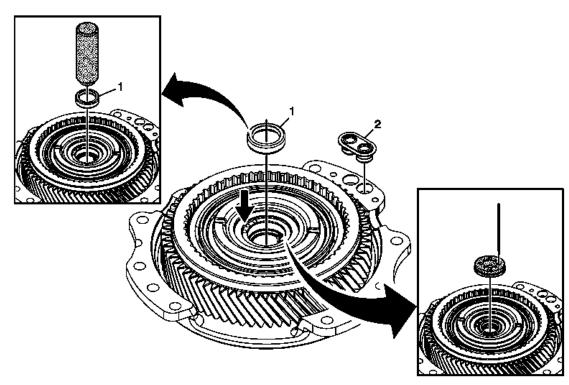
Identifying Front Differential Transfer Drive Gear Support Fluid Passage Tube Courtesy of GENERAL MOTORS COMPANY
